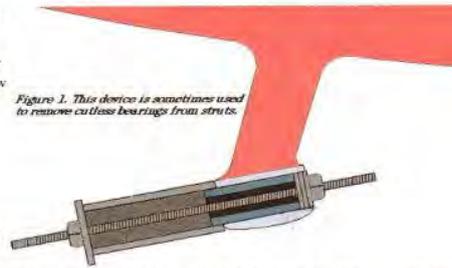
This device is sometimes used to remove cutless bearings from struts.
